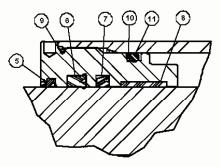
Standard cylinder assembly of seal(s), wiper, backup and o-ring.
